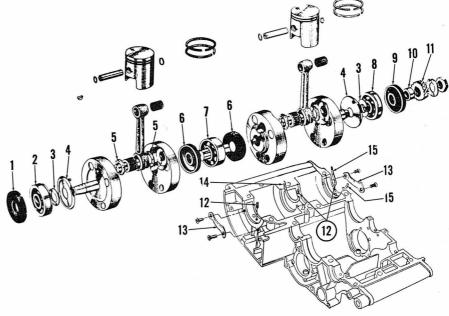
Exploded view of X-6 crankshaft assembly.
